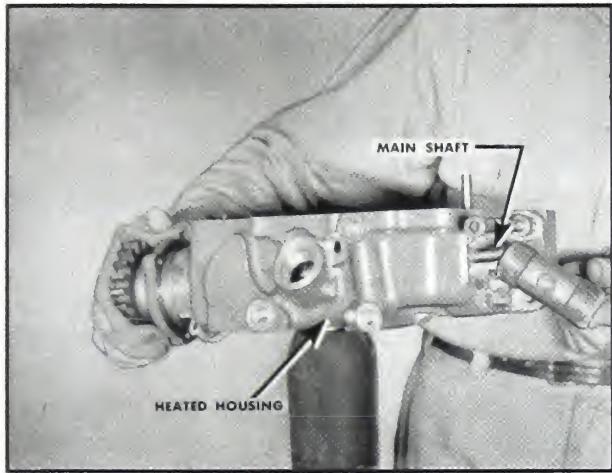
Driving out main shaft—hydraulic-governed pump
